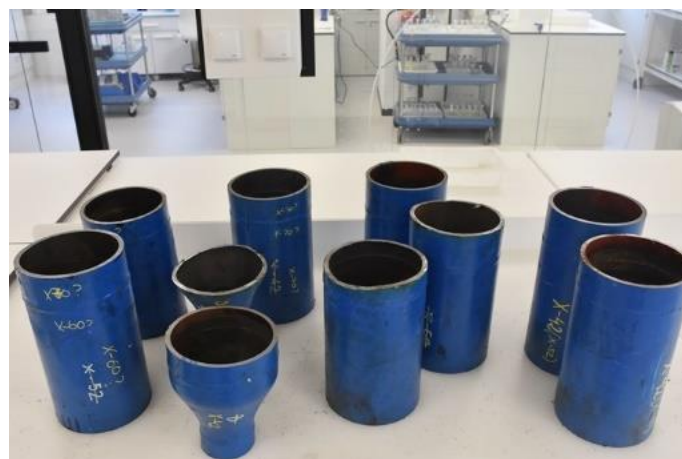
Aspect of the welded pipe sections delivered to Tecnia after the 100 mol% H₂ campaign
